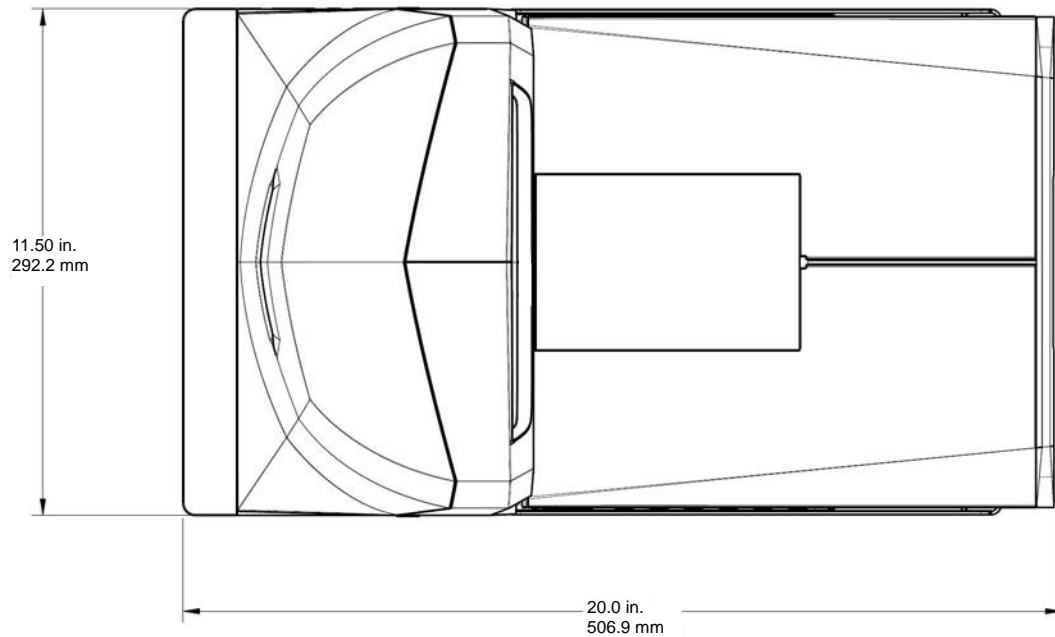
MP6000 - Long Unit Side View Dimensions
